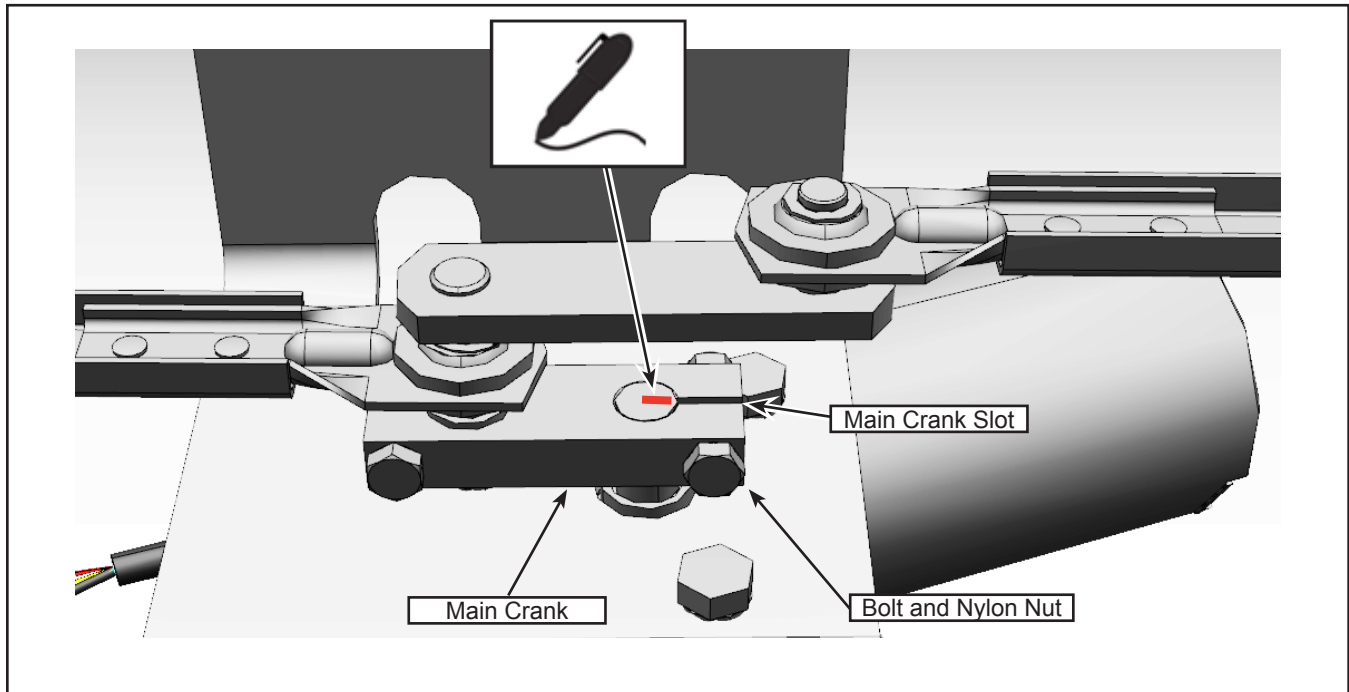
Mark the Position on the Shaft and Remove the Main Crank
